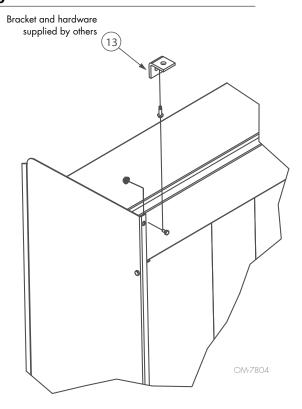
WETTED MEDIA SYSTEM ASSEMBLY DRAWING
